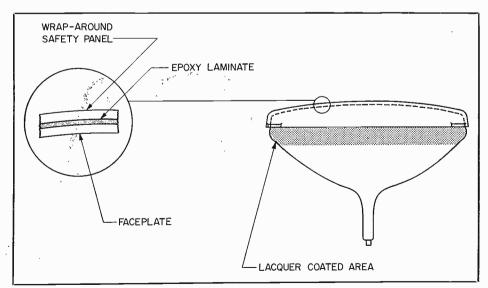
Cross section of Bonded Shield tube showing sandwich construction of face. Also shown is lacquer band that protects critical area of bulb behind wrap-around panel.
